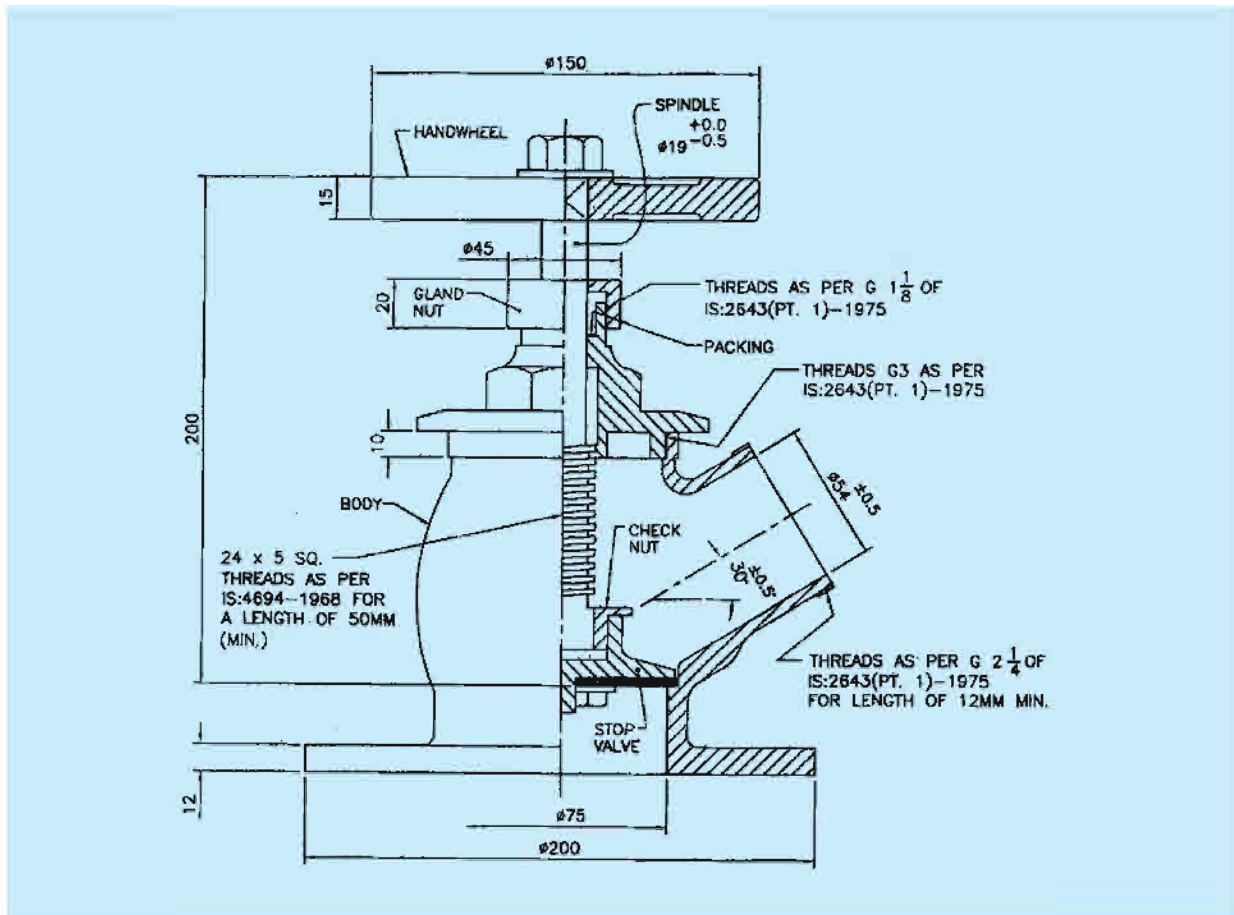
Landing Valve Single outlet (TYPE - A)
